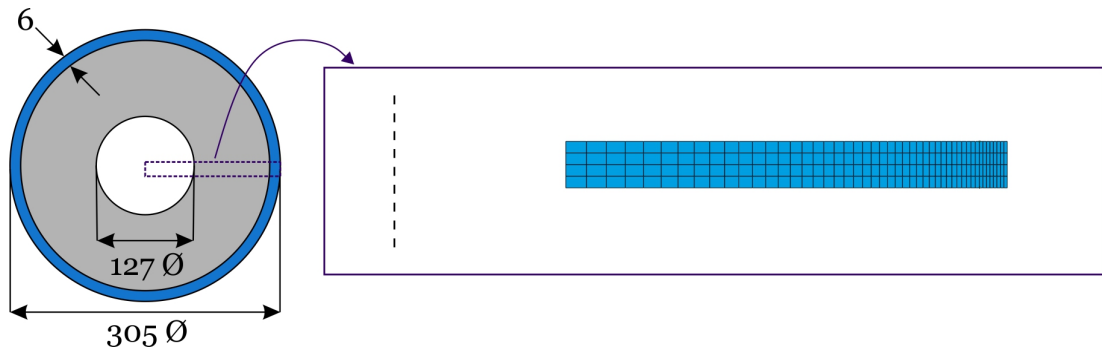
Model for clad deposition on outer diameter of cylinder - Illustrating the transformation of the weld clad cylinder into an axisymmetric model. Dimensions in millimetres.
